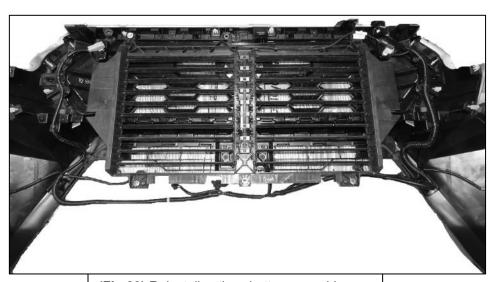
Trim lower section of front clip under guide lines. Bumper disassembled for illustrative purposes only
